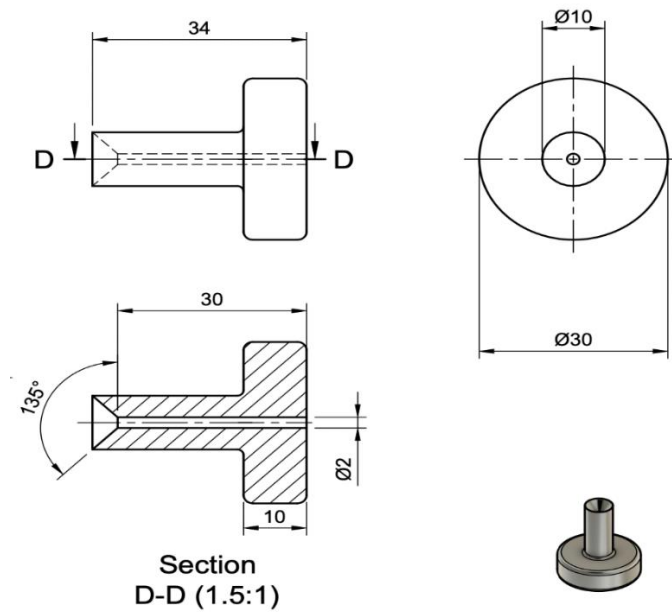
Extruder mold technical and isometric three-dimensional drawings used in cement measurements.
